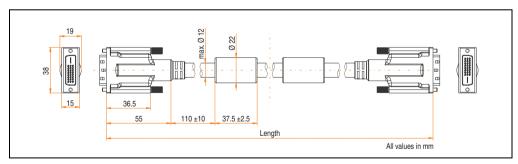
Dimensions - SDL flex cable 5CASDL.0xxx-03
